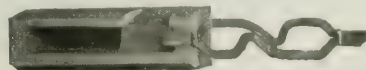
BOND WIRES IN MOLD FOR COPPER WELDING.
